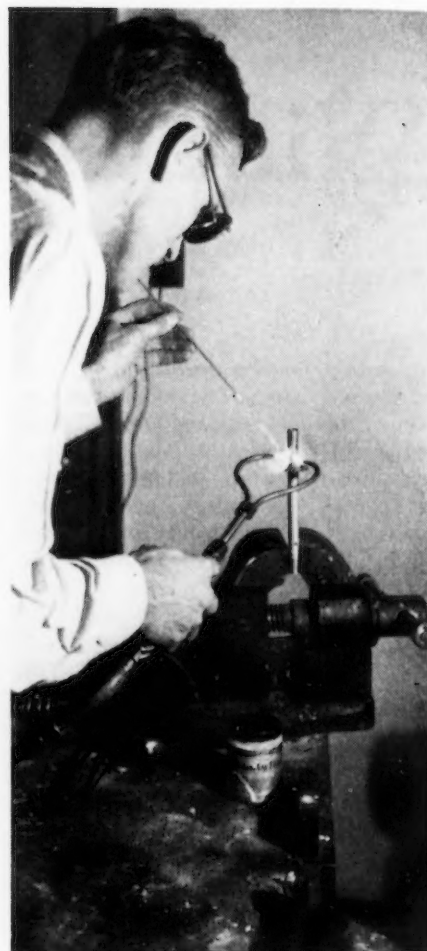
Small multi-flame oxy-acetylene torch for small parts.
